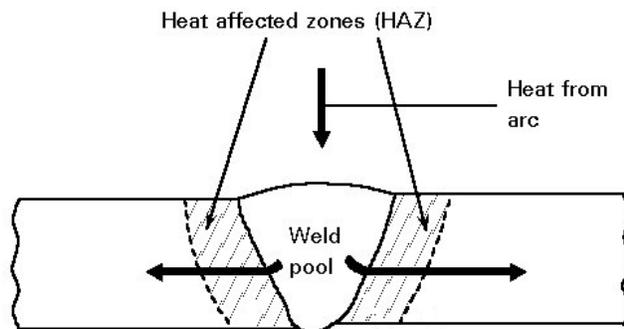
HAZ regions in welded joint process [2].
